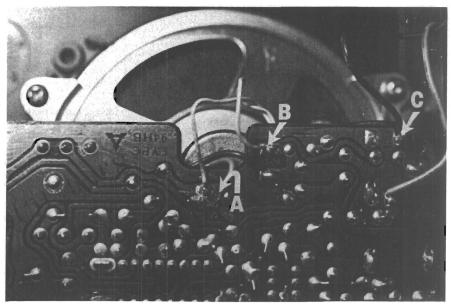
Blown-up view of the unmodified cassette PC board with key points identified.
